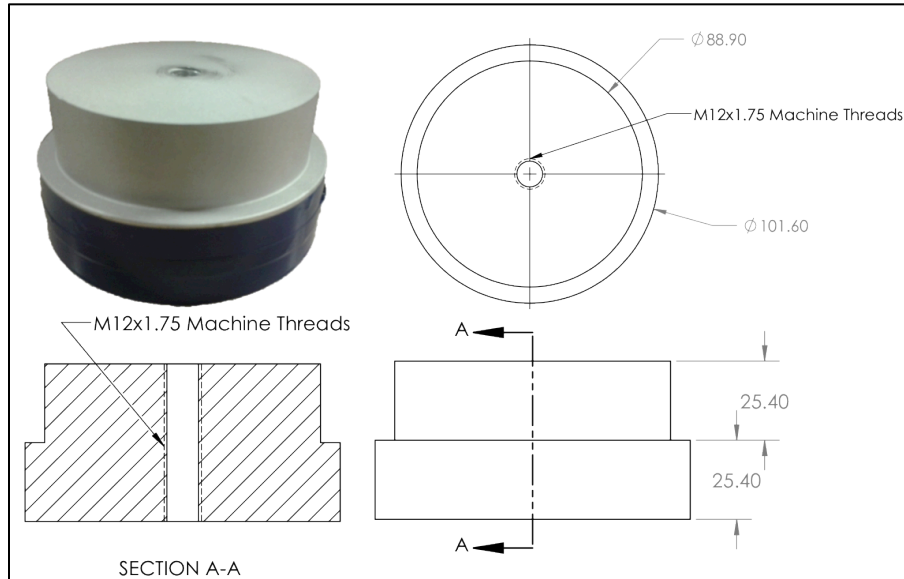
Aluminum alloy substrate dimensions for the repair of threads on the nose landing gear steering actuator (dimensions are in mm).
